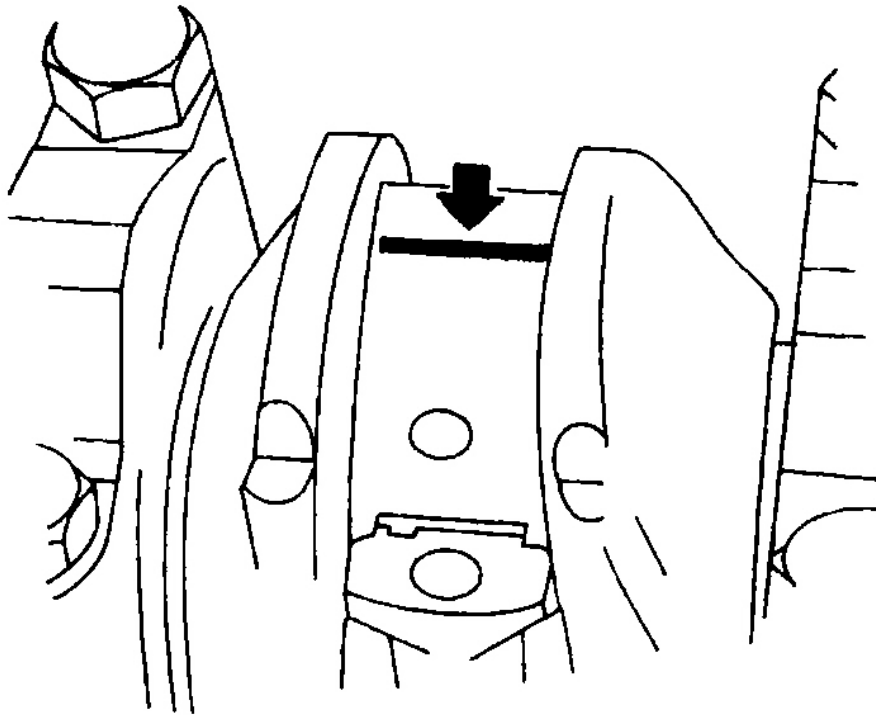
Inspecting Bearing Clearances For Permissible Tolerance Ranges
